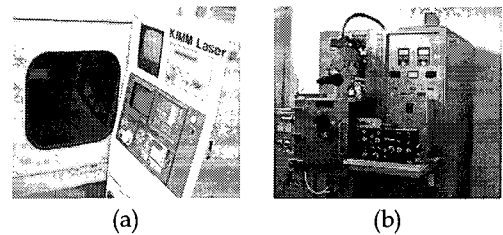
Photos of (a) Lumonics Nd:YAG Laser and (b) Electron Beam Welding system.
